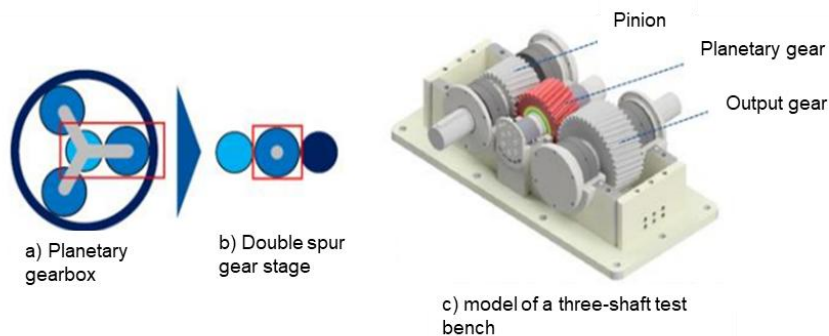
Three-shaft test rig for plain bearings in wind turbine gearboxes at CWD of RWTH Aachen University
